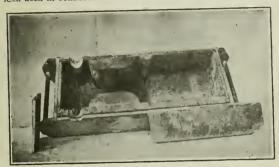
Illustrating the "splay" used in fitting liners to the mould box. The liner standing in front of the mould shows the splay at the end. The edge of the liners standing against the end of the mould shows the splay of the face, the top in this case being about an eighth of an inch thicker than the bottom.
